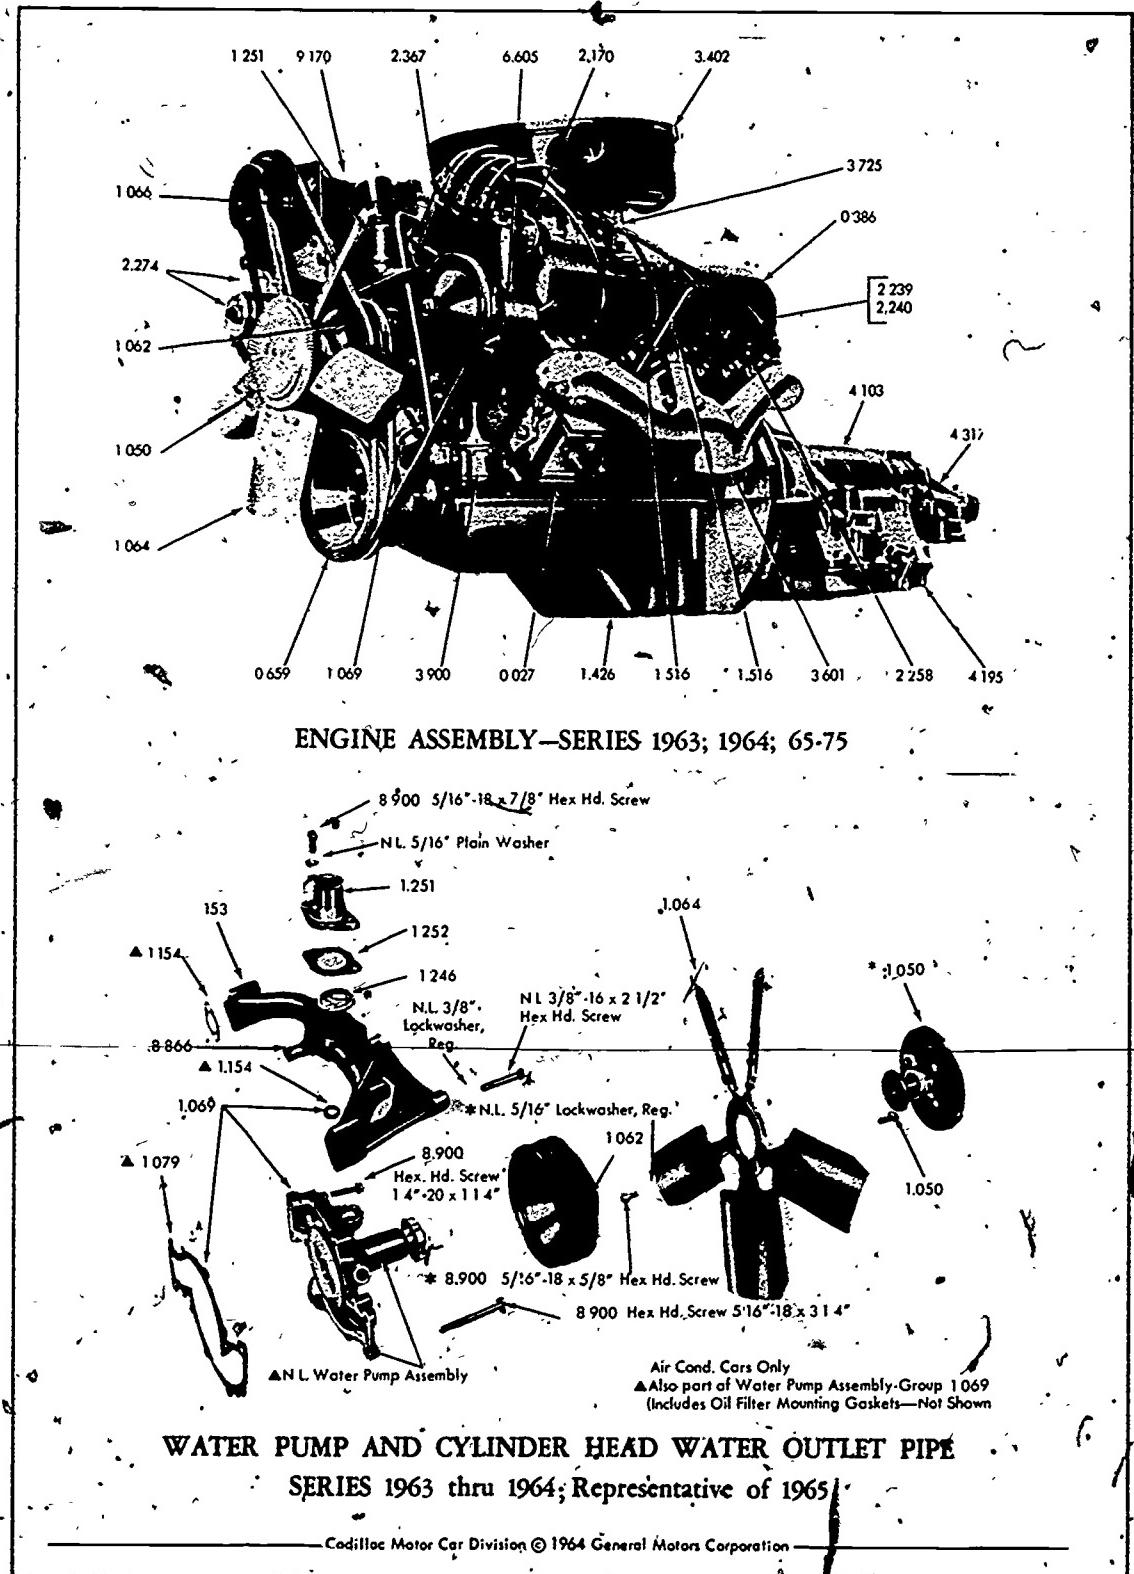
Specimen page of Cadillac parts catalog that illustrates engine assembly
